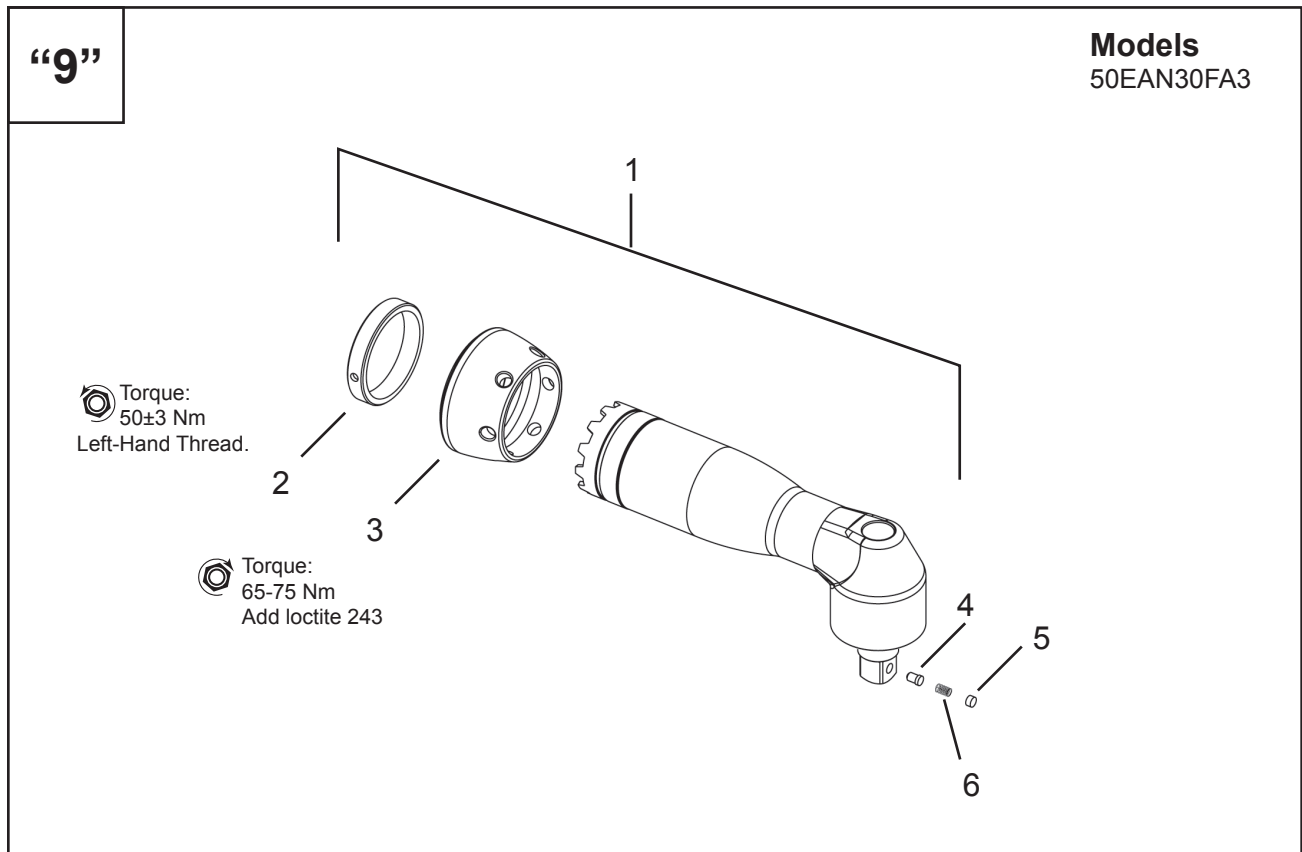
”: 302172PT Angle Head Attachment (FA3)
